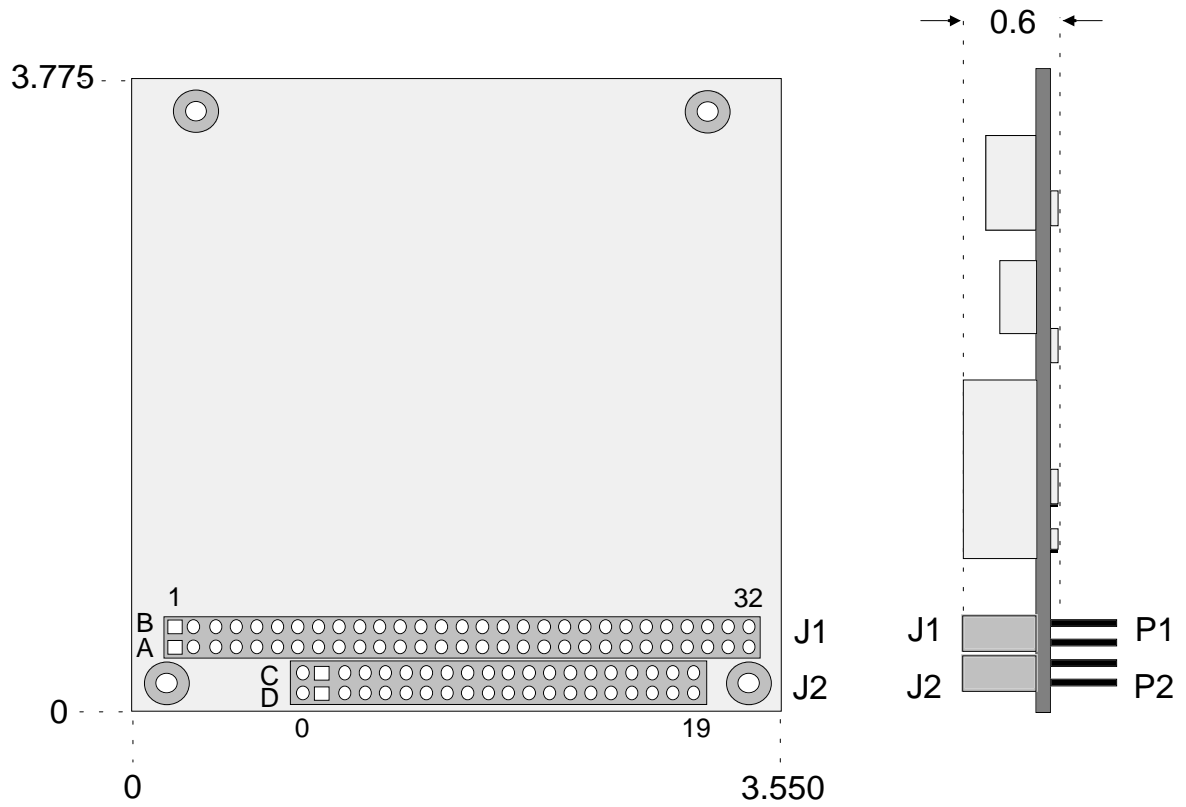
Basic mechanical dimensions, 16-bit PC/104 module.
